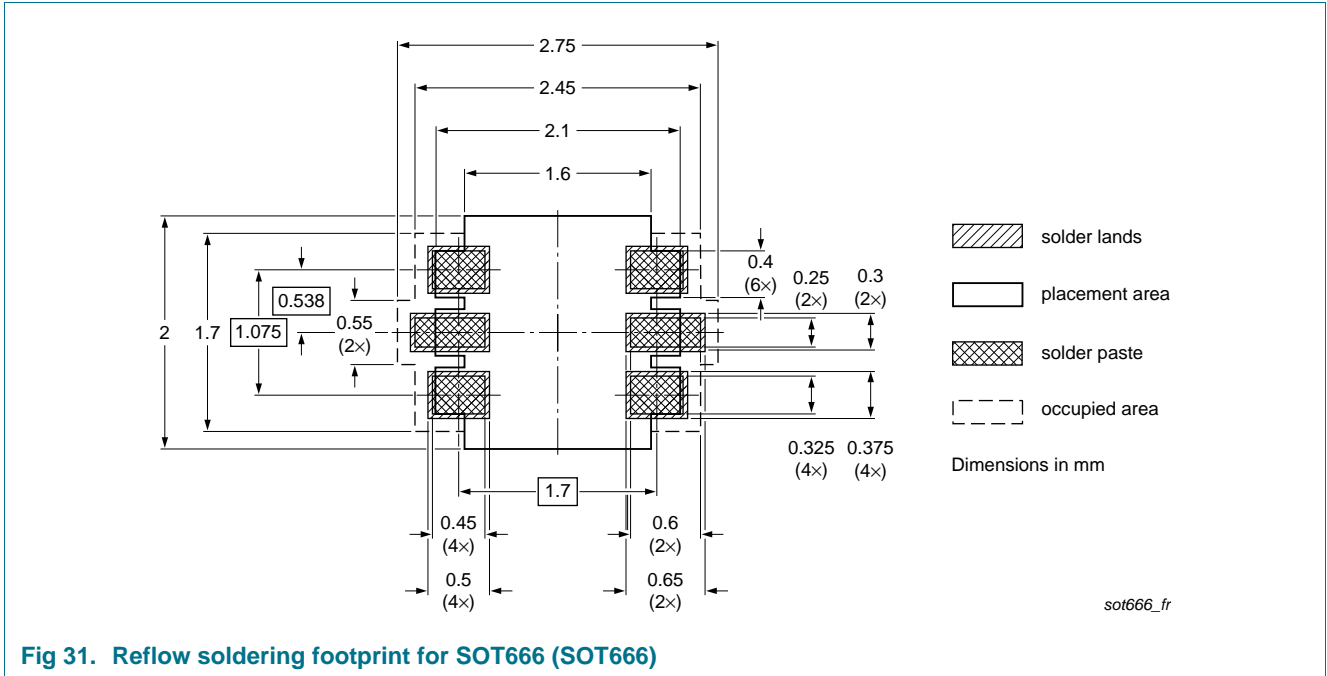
Reflow soldering footprint for SOT666 (SOT666)
